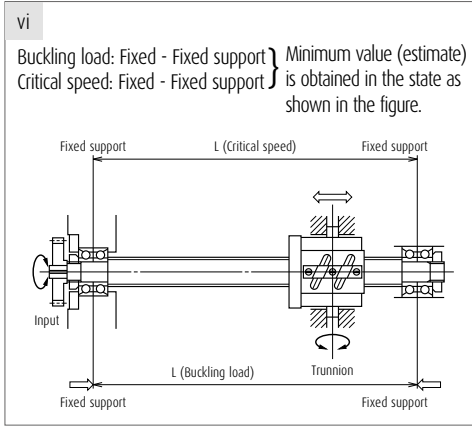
Supporting conditions of screw shaft and ball nut
